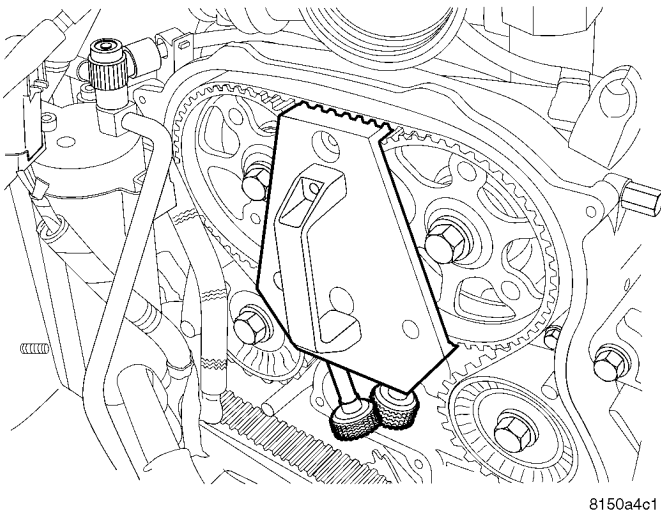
VM.1085 CAMSHAFT LOCKING TOOL
